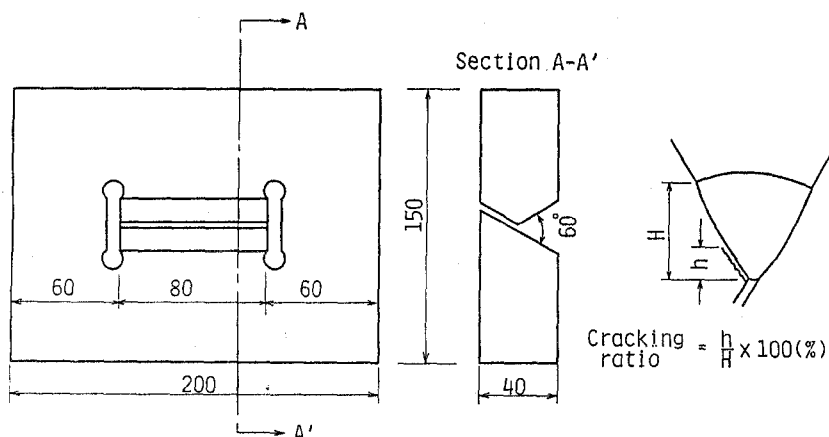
Oblique Y groove weld cracking test specimen
